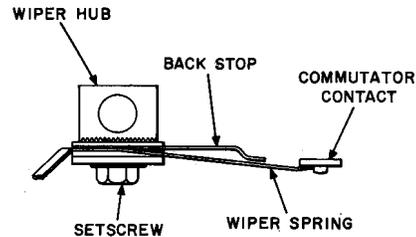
Position of Commutator Wiper Spring on Commutator Contacts
